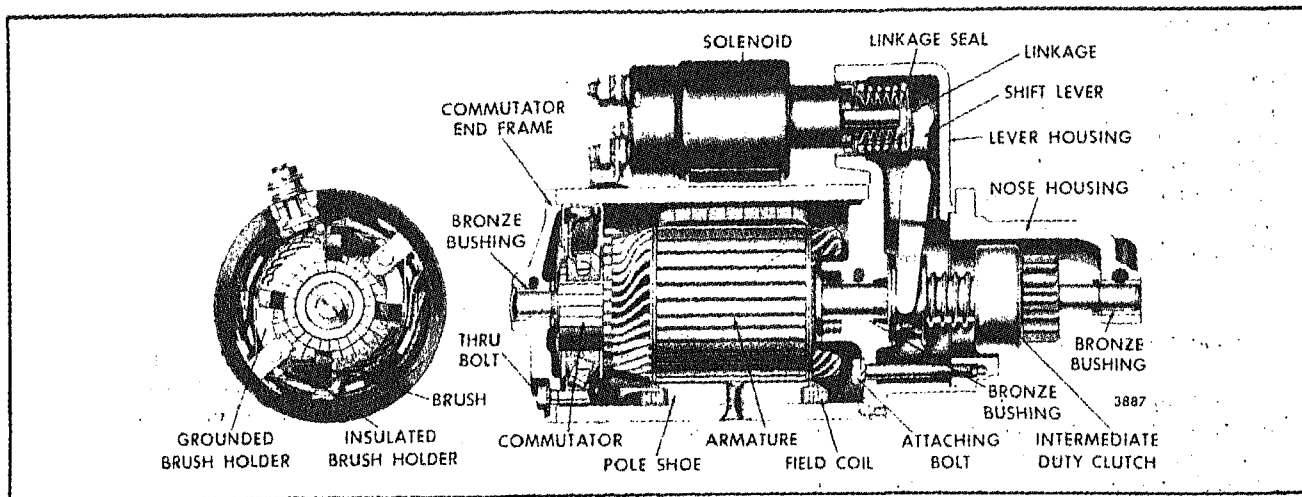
Cross-Section of Motor with Intermediate-Duty Clutch
